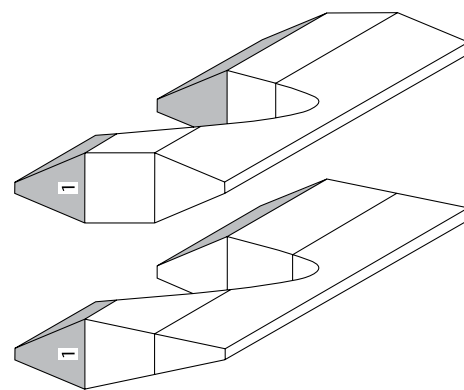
Figure D. Once the parts are separated from the assembly, sand to the shape shown.
